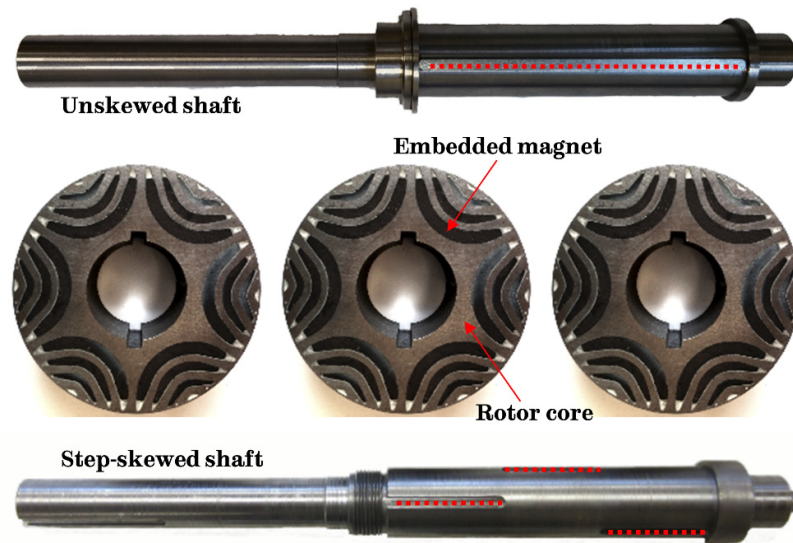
Prototype rotor stacks with embedded magnets, 3-step-skewed and unskewed rotor shafts.
